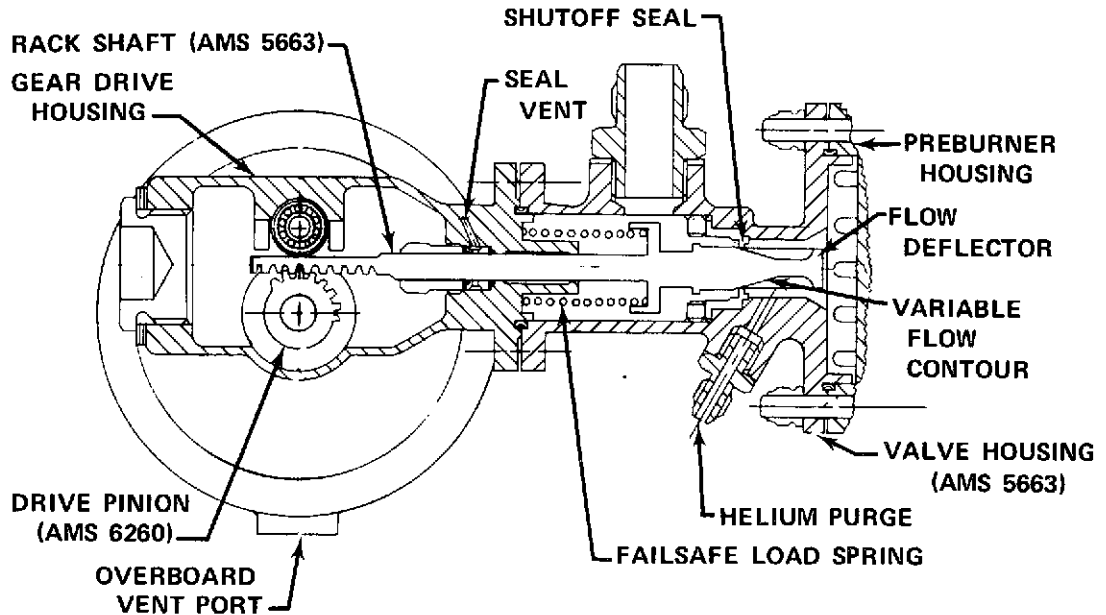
Preburner Oxidizer Valve Cross Section FD 72491
